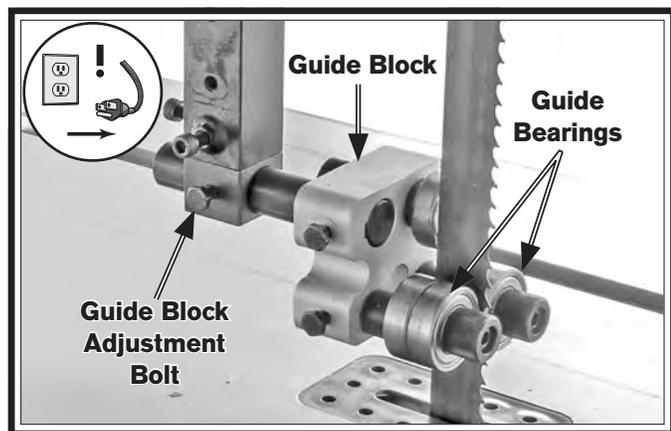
Upper guide bearing components (guide post cover removed for clarity).
